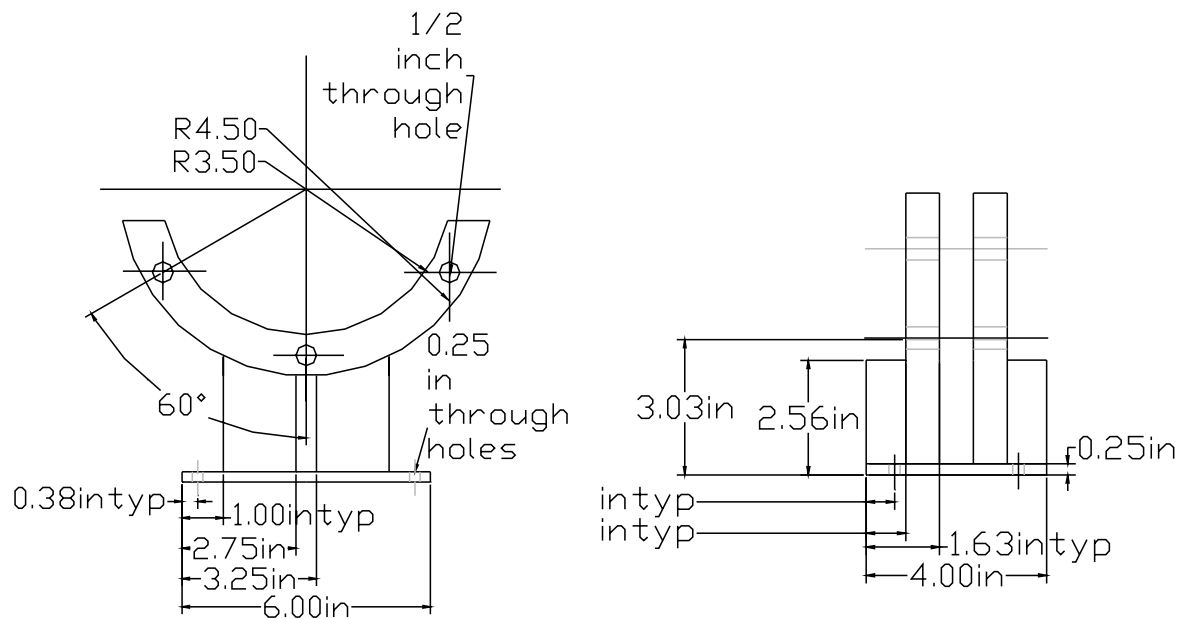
Details of adjustable stand (#2 on assembly drawing).
